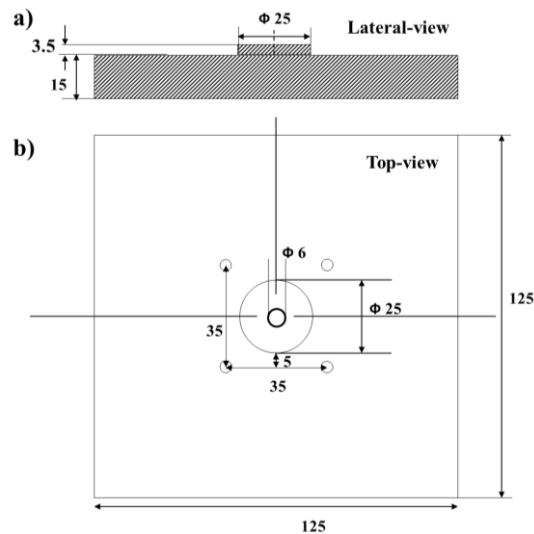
(a) Lateral-view and (b) top-view of the aluminum stage. Dimensions are in mm.
